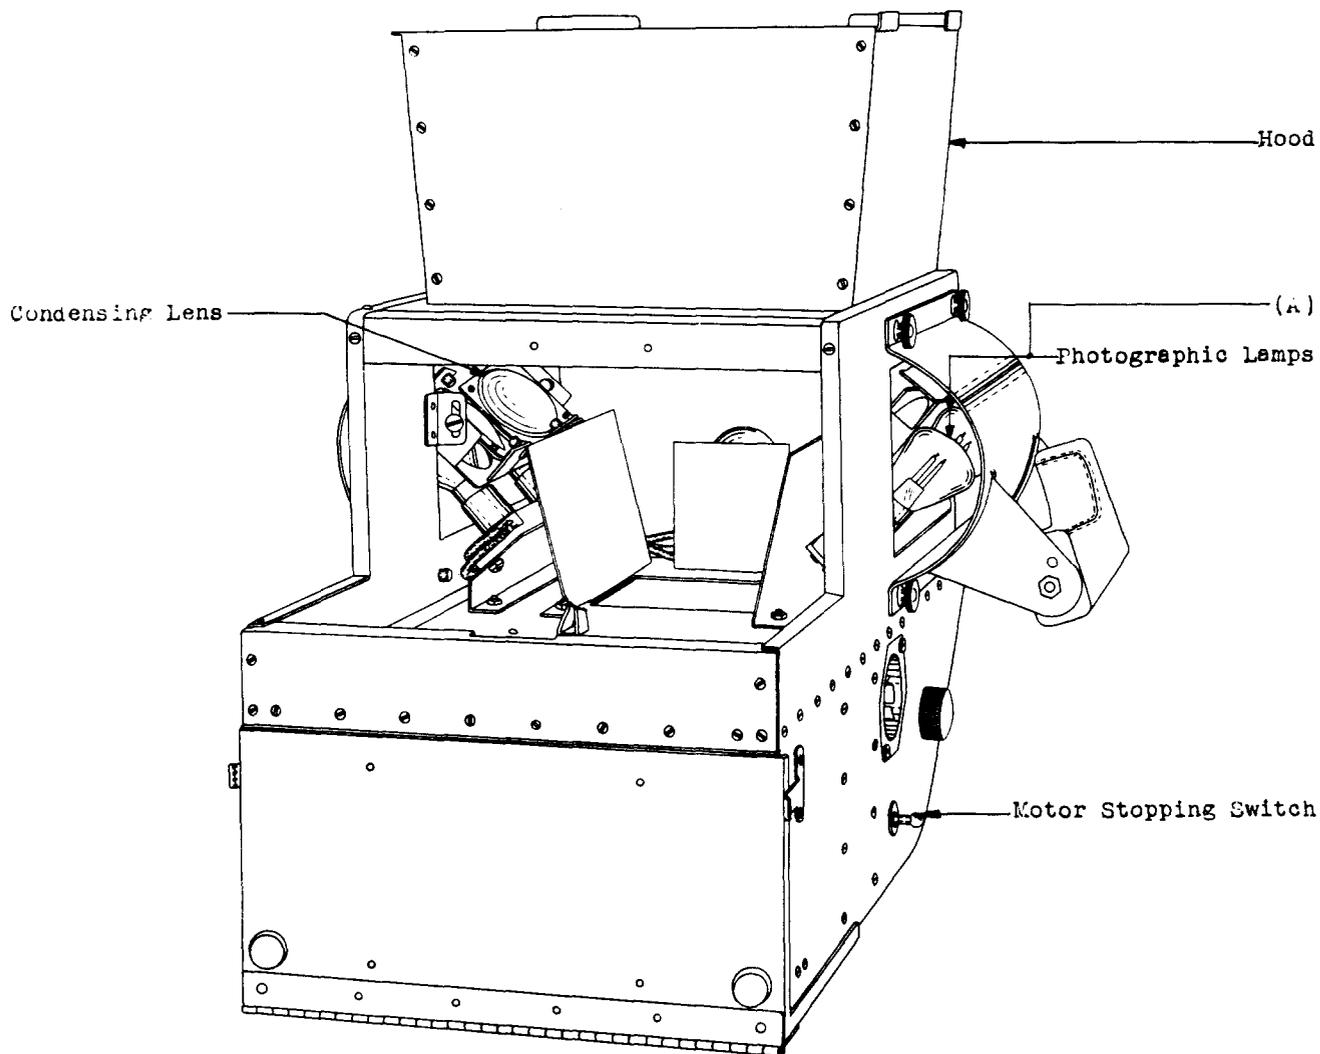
KS-7703 Camera (Motor Drive Removed)
